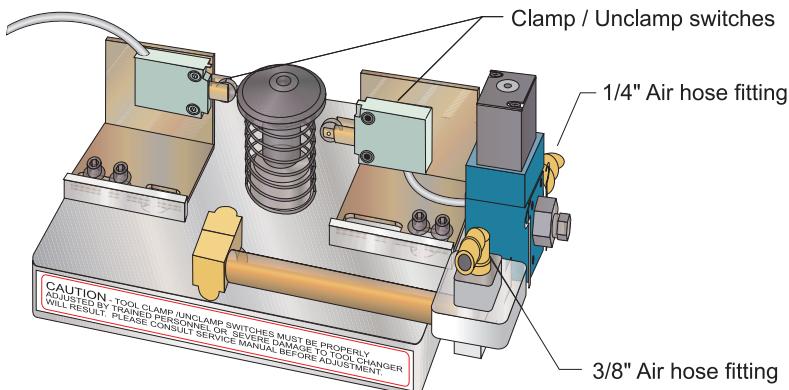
Tool release piston assembly with air solenoid assembly.
